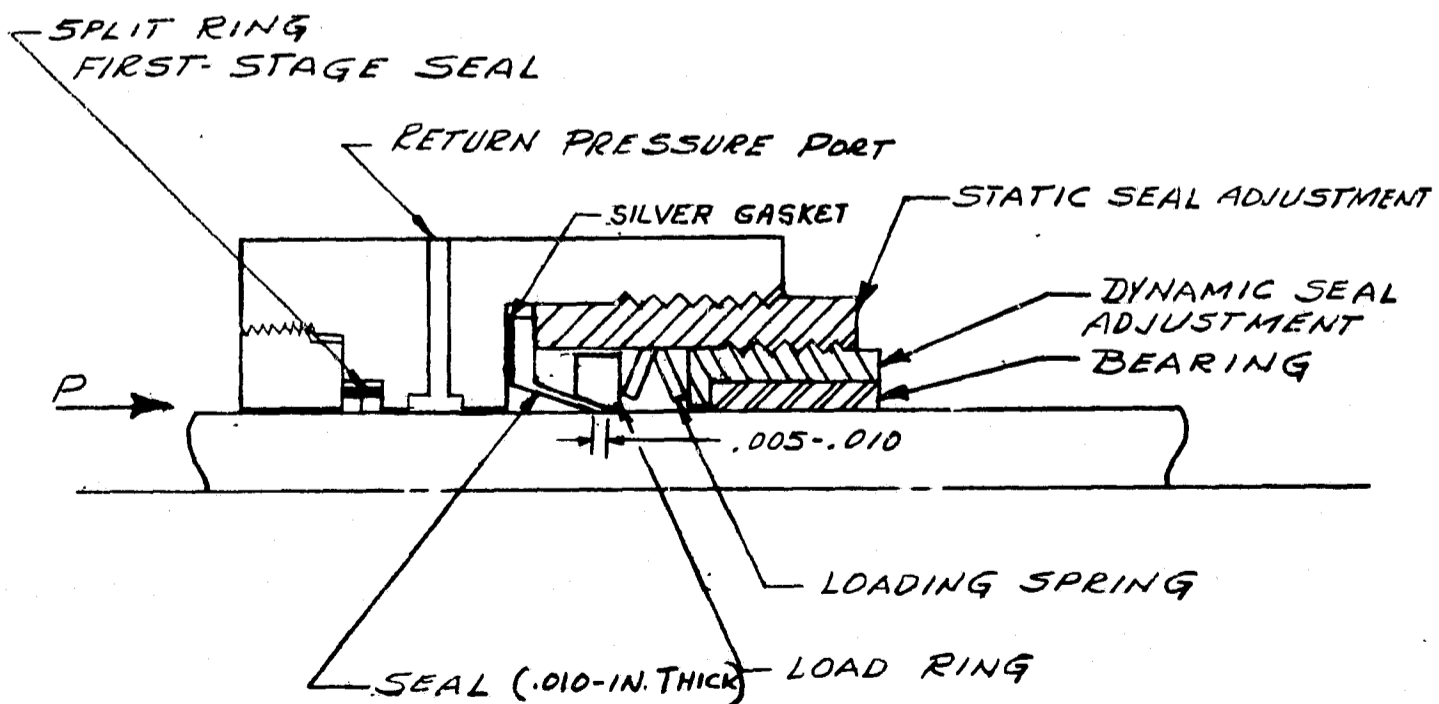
Design F - Metallic Lip Seal (Hard Metal)
